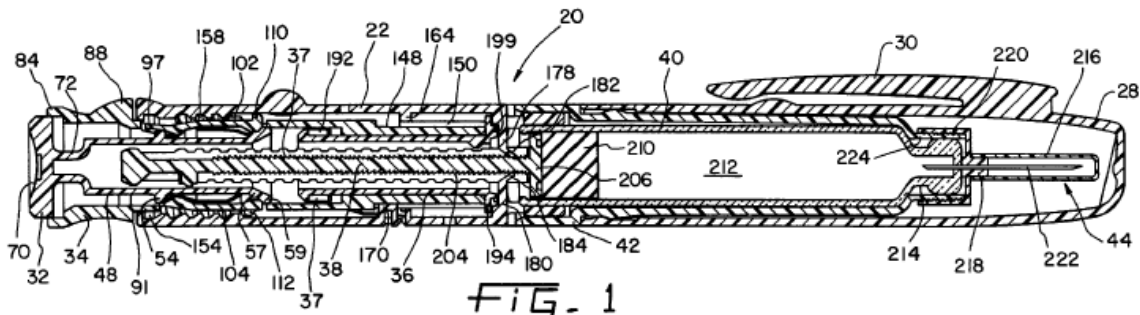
“is a sectional assembly view” of Burroughs’s device. *Id.* at 6:40–41.
